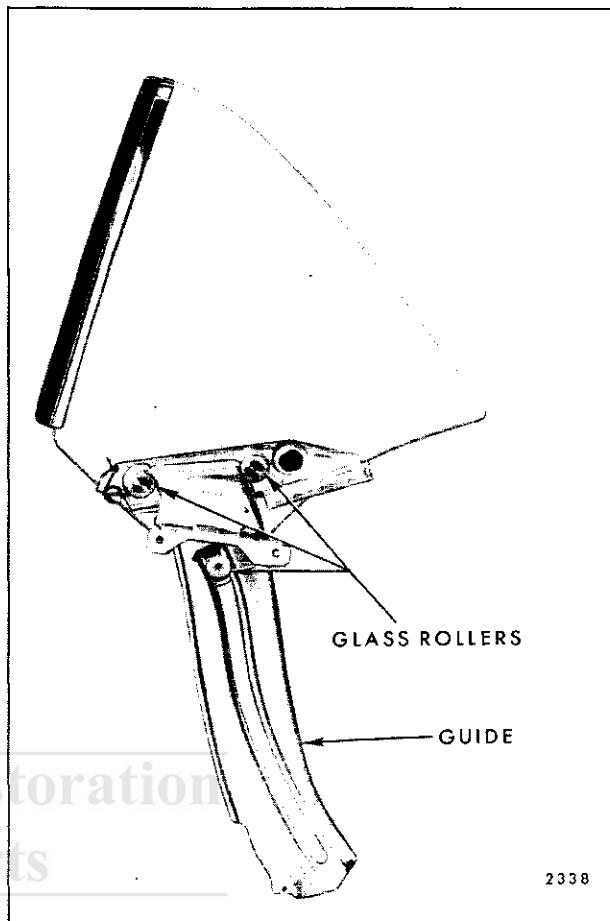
Rear Quarter Window and Guide Assembly - "F" Styles
